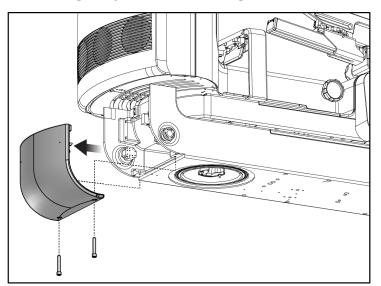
Removal of Detector-end cover of Tube Arm Mechanism
